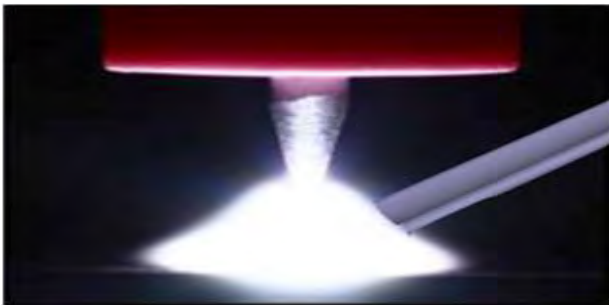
Shape of wide filler wire in Super TIG welding [11]
